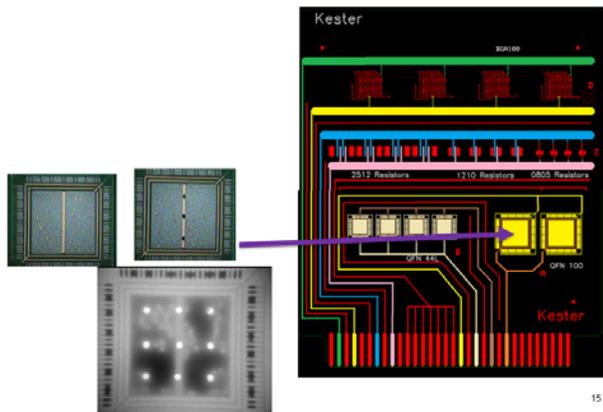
Custom-designed SIR testing board under components - QFN 100 Sensor Traces
